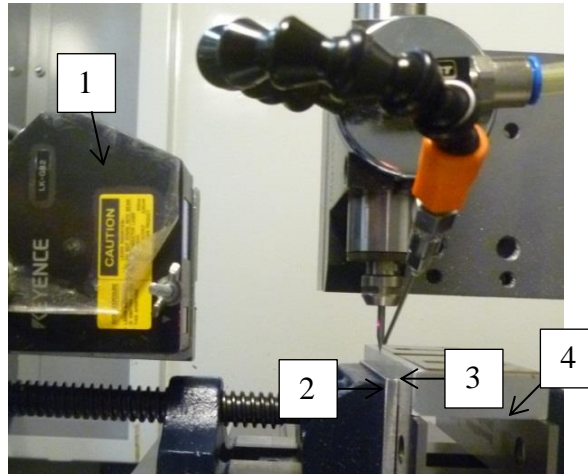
Set-up of the Tool Runout Measurements on HAAS OM2 Micromilling Machine with Keyence Displacement Laser: (1) Keyence Laser; (2) Micro Ball End Mill  $\text{\O}0.152\text{mm}$ ; (3) Coolant Nozzle; (4) Workpiece.
